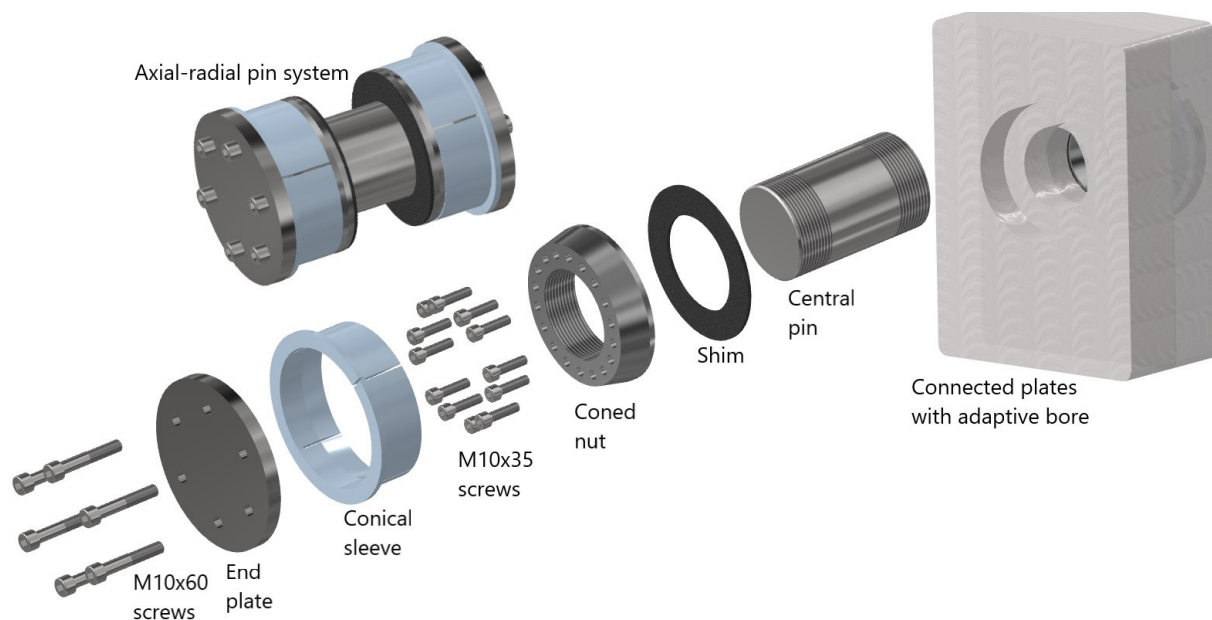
Axial-radial pin system with exploded view and adaptive connecting plates
